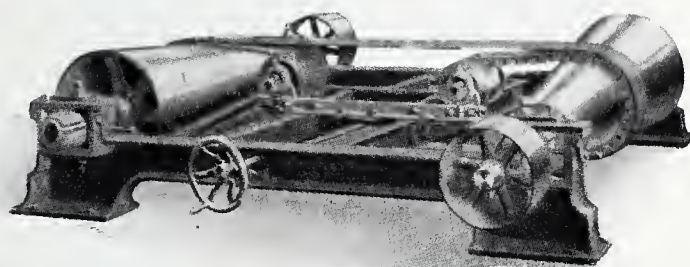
MOORE AND WHITE VARIABLE SPEED GEAR.
